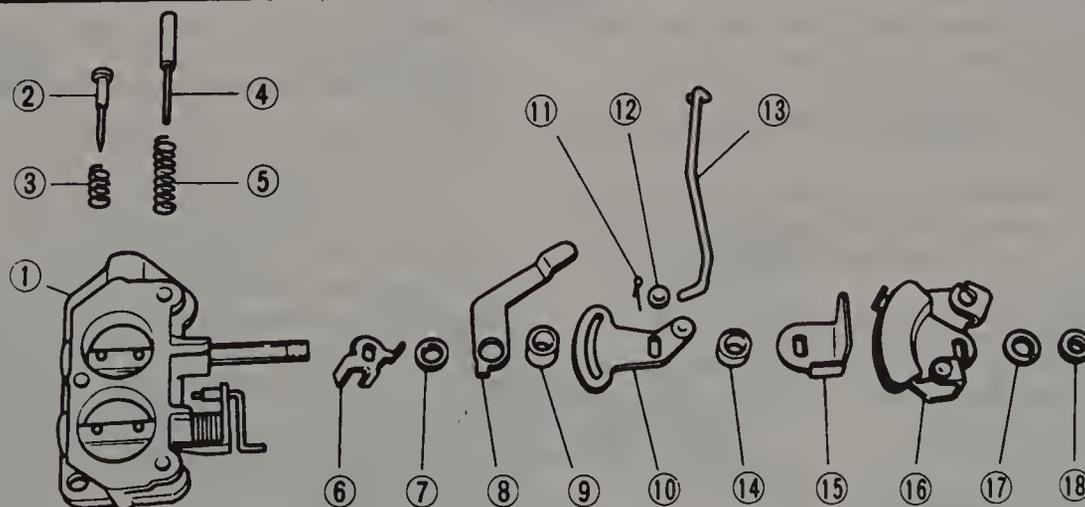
Throttle valve shaft components – exploded view (Sec 8)
